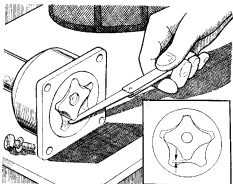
Checking the oil pump rotor clearance (2nd position)
